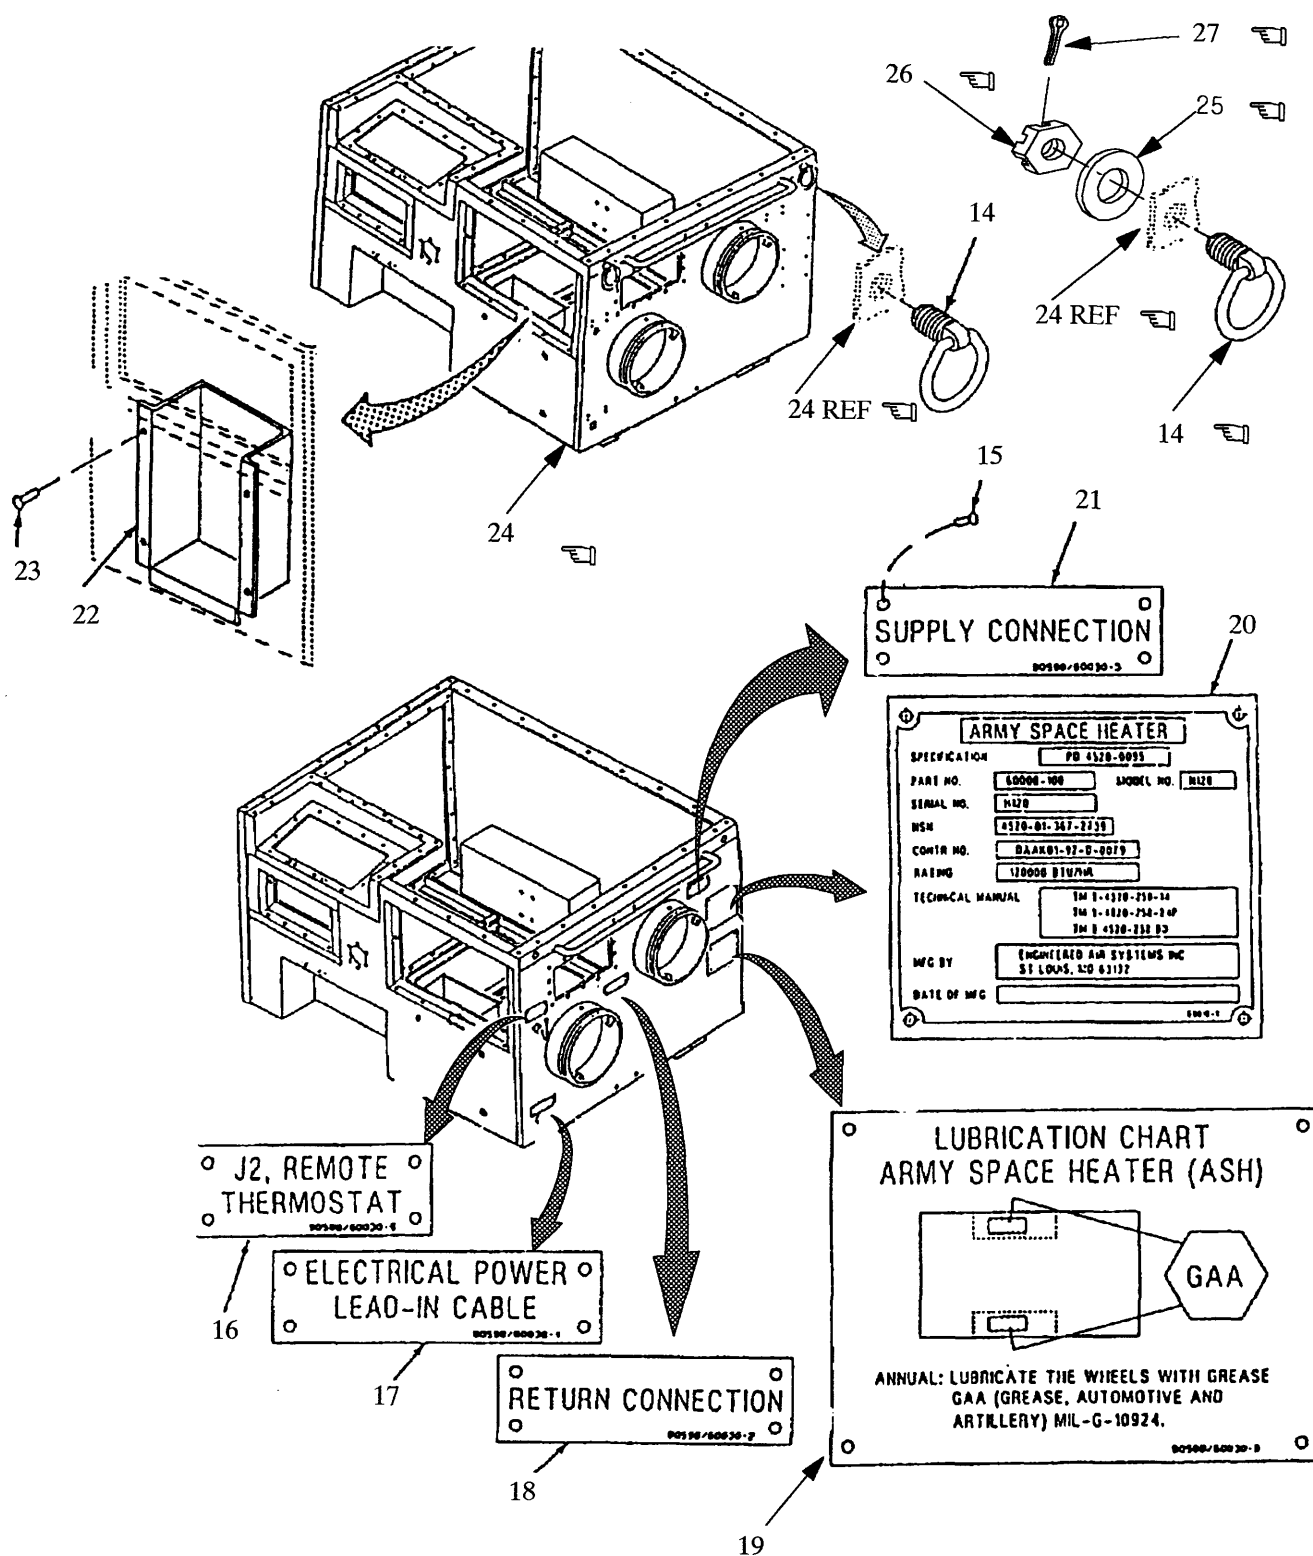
Frame Assembly Assembly (Sheet 2 of 2)
